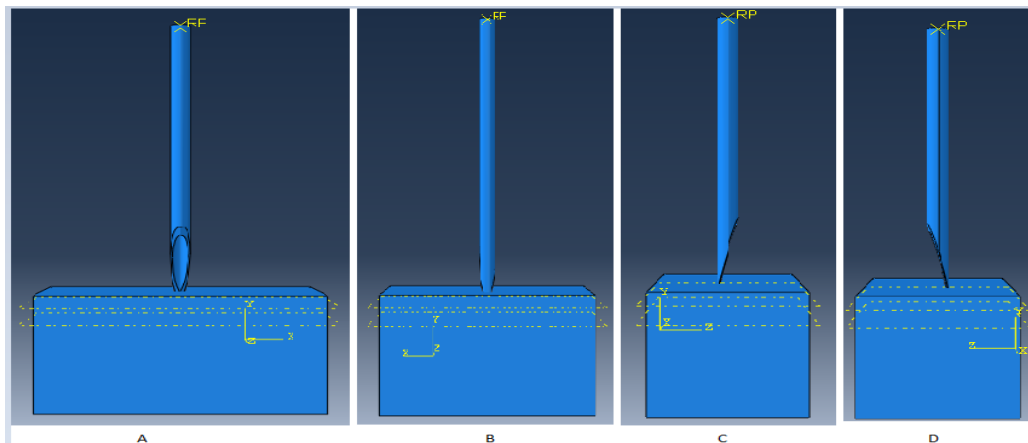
The (A) Front, (B) Back, (C) Left and (D) Right views of the assembly
